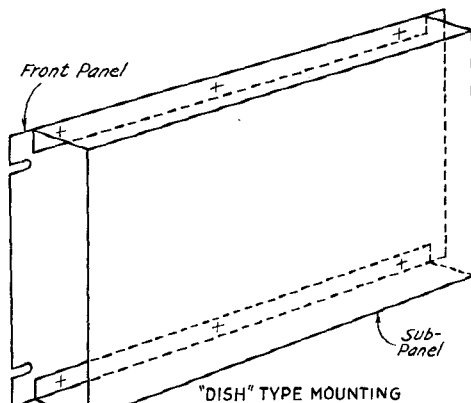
THE "DISH" TYPE OF SUB-PANEL MOUNTING FOR THE RELAY RACK
